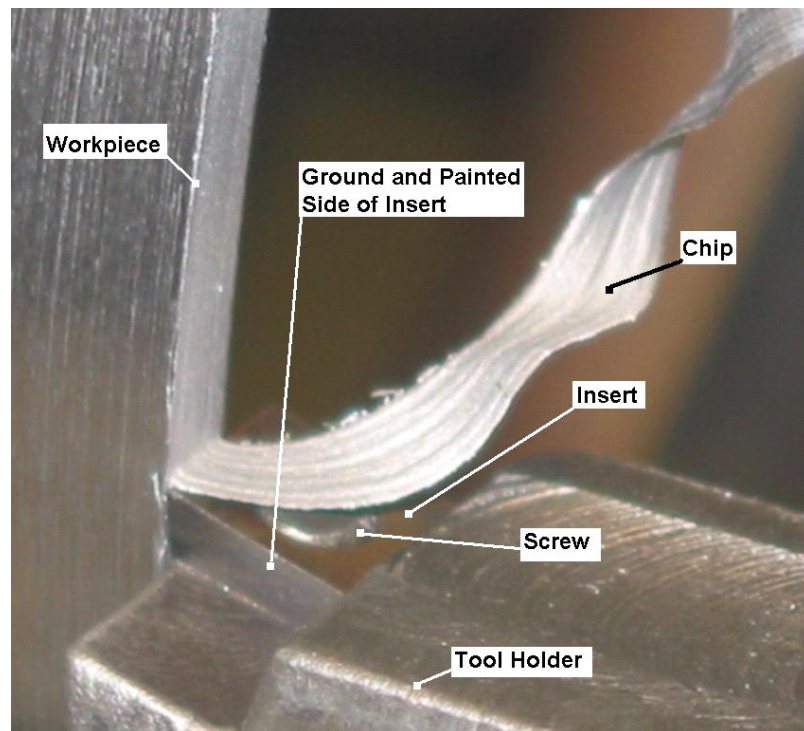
(c) Close up showing relative arrangement of chip and insert. Notice the distance between chip edge and side edge of the tool. The left side of the tool is ground and painted with a black paint of emissivity of 0.95.
